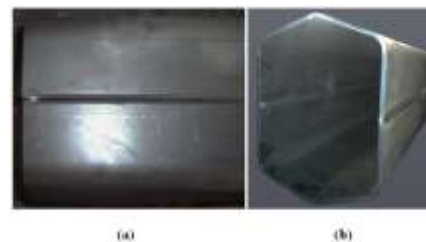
Traditional boom production (a) corner joints, (b) welded boom shape
